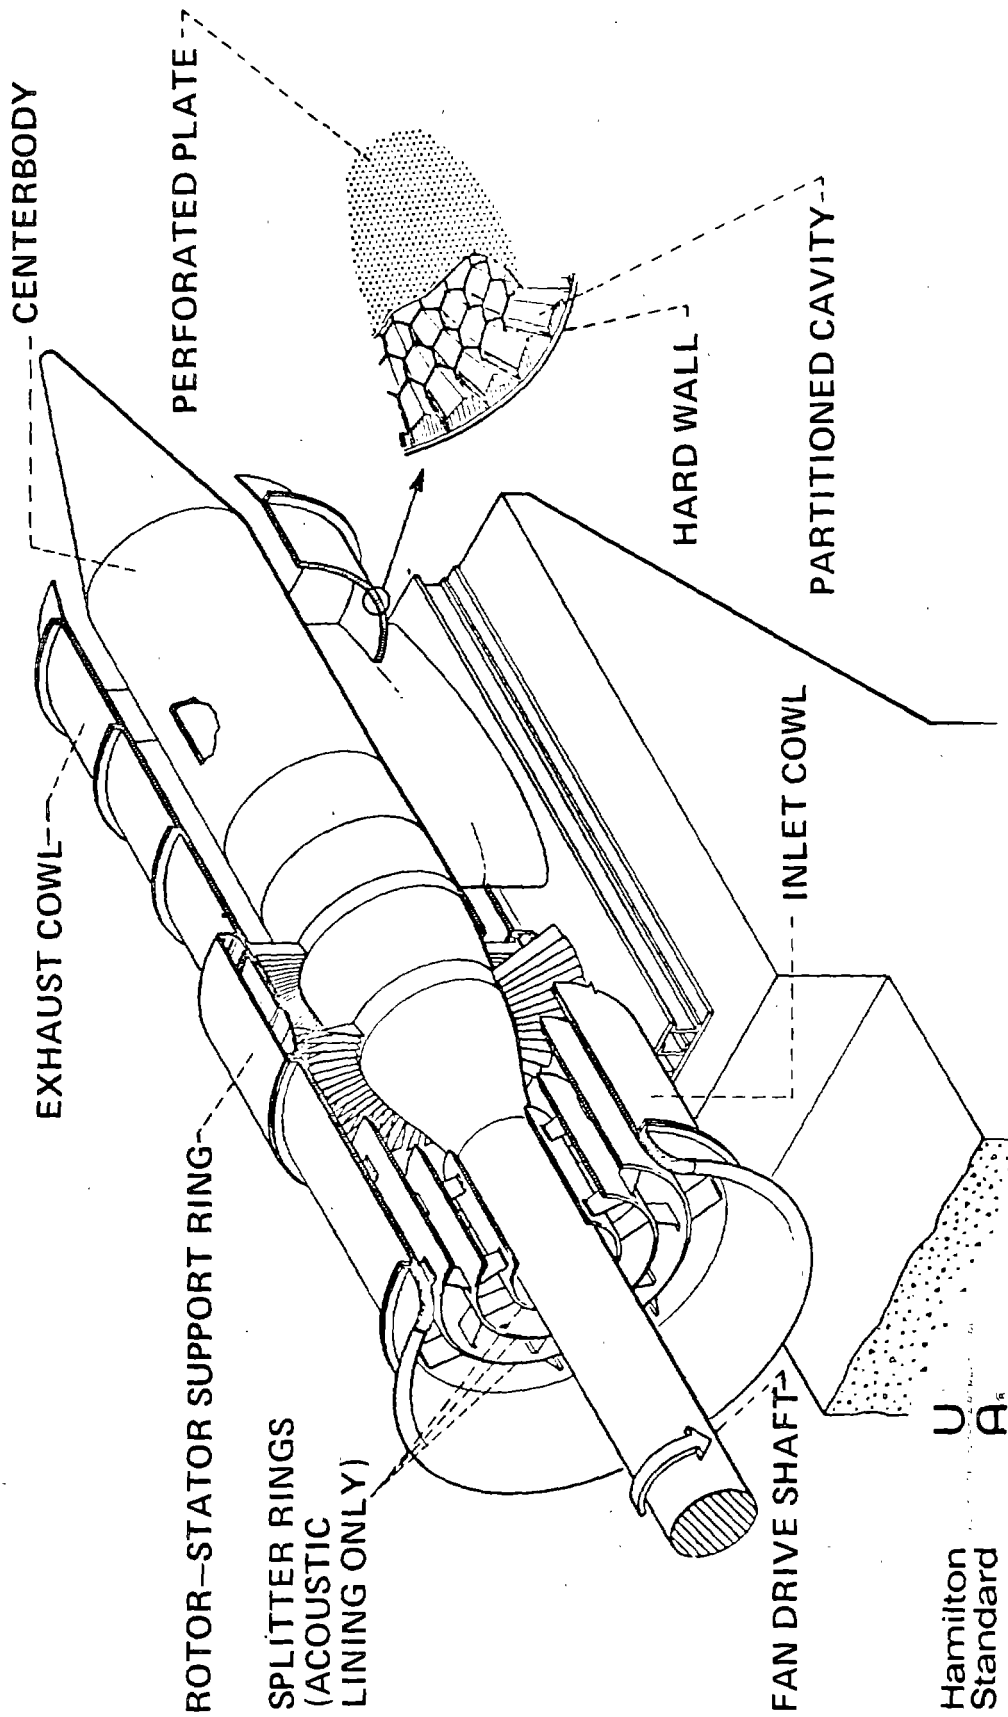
CUTAWAY VIEW OF QF1 FAN AND SUPPRESSOR ASSEMBLY
